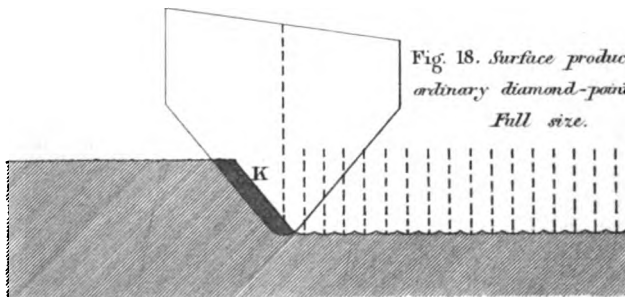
Surface produced by ordinary diamond-pointed tool. Full size.
